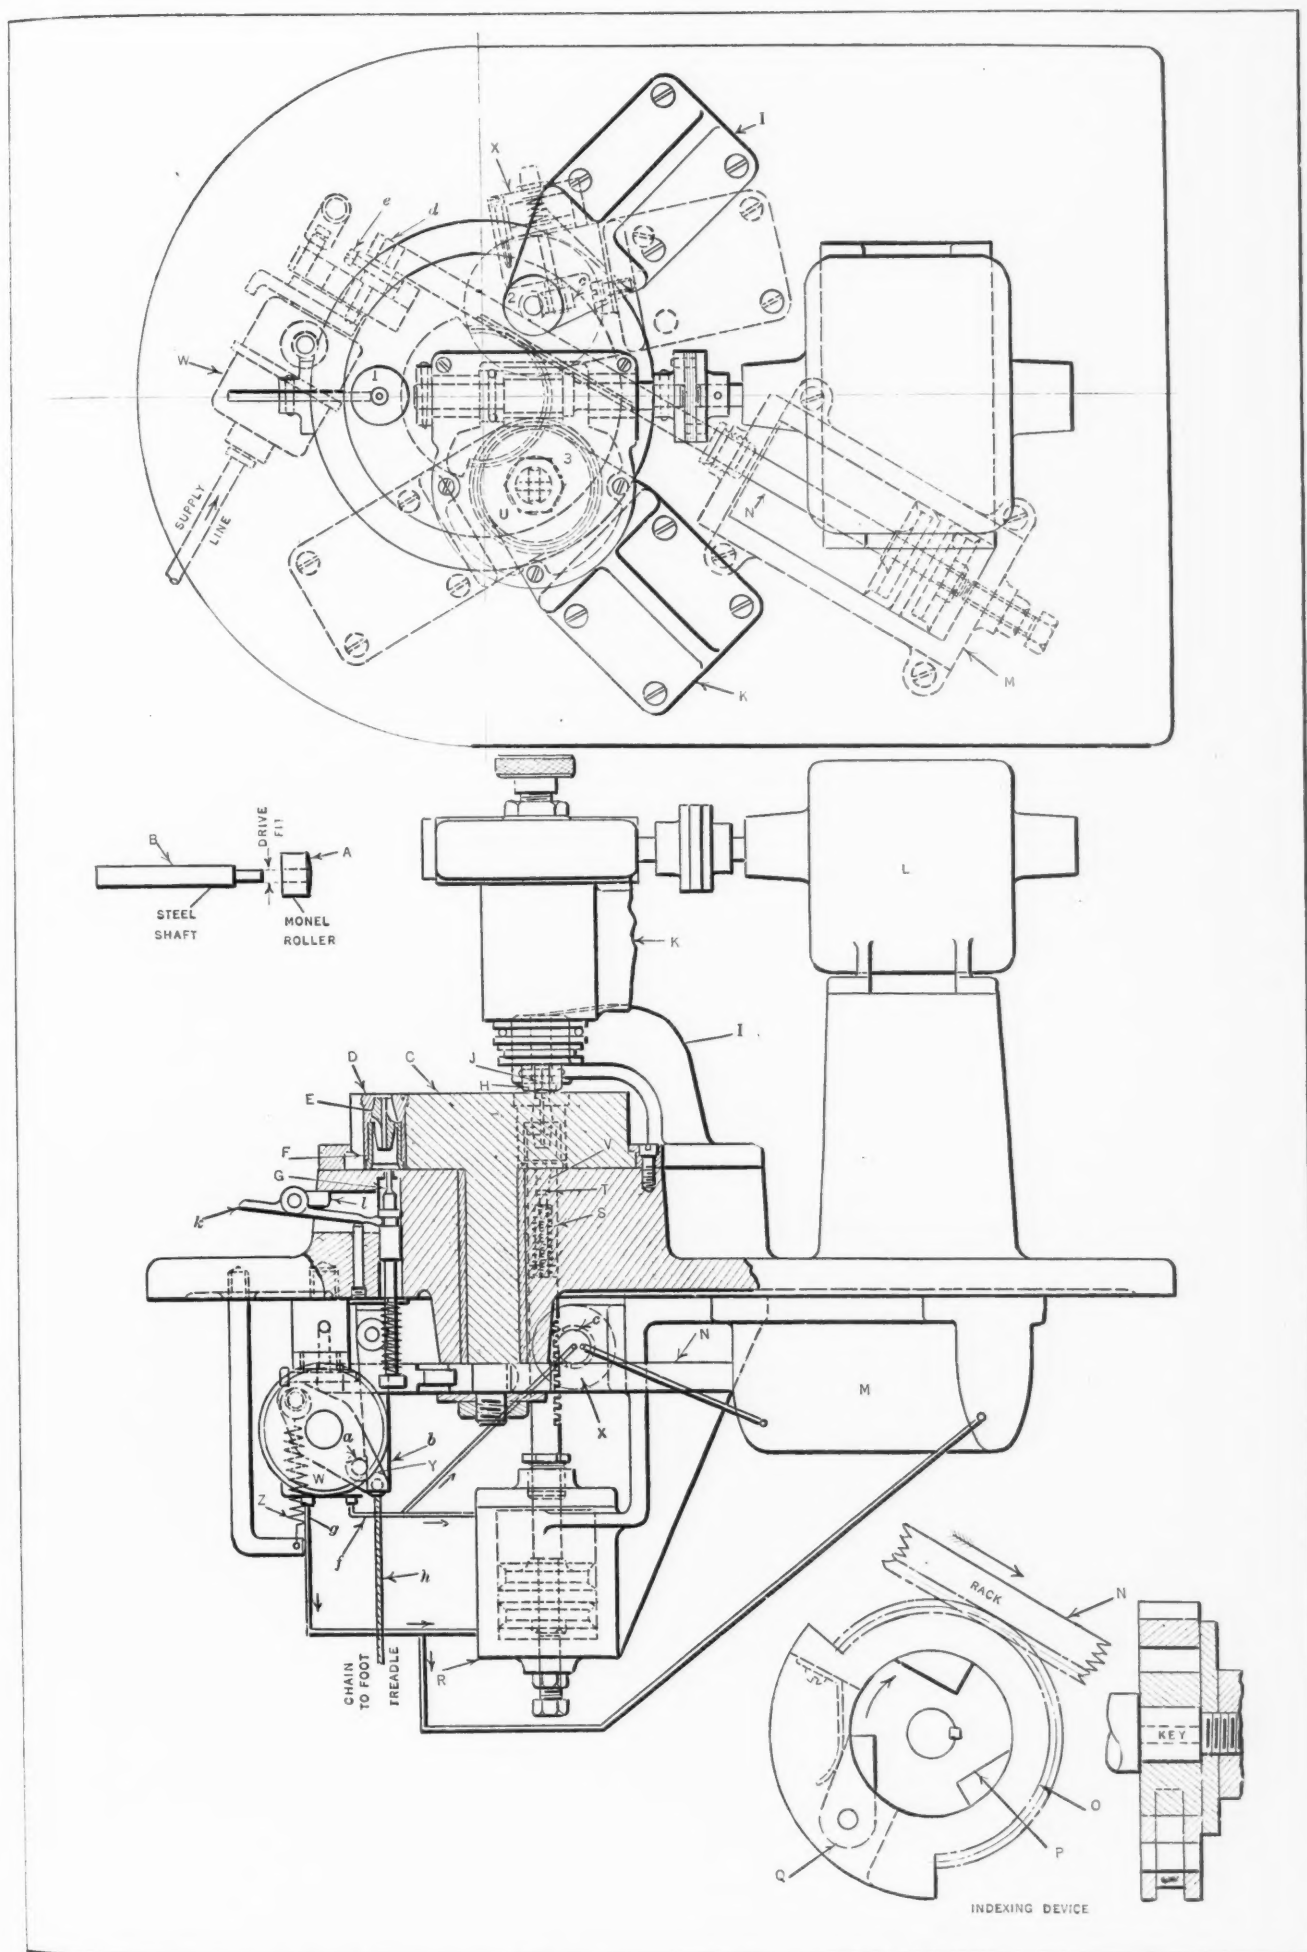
Air-operated Fixture for Assembling Shaft B and Roller A
